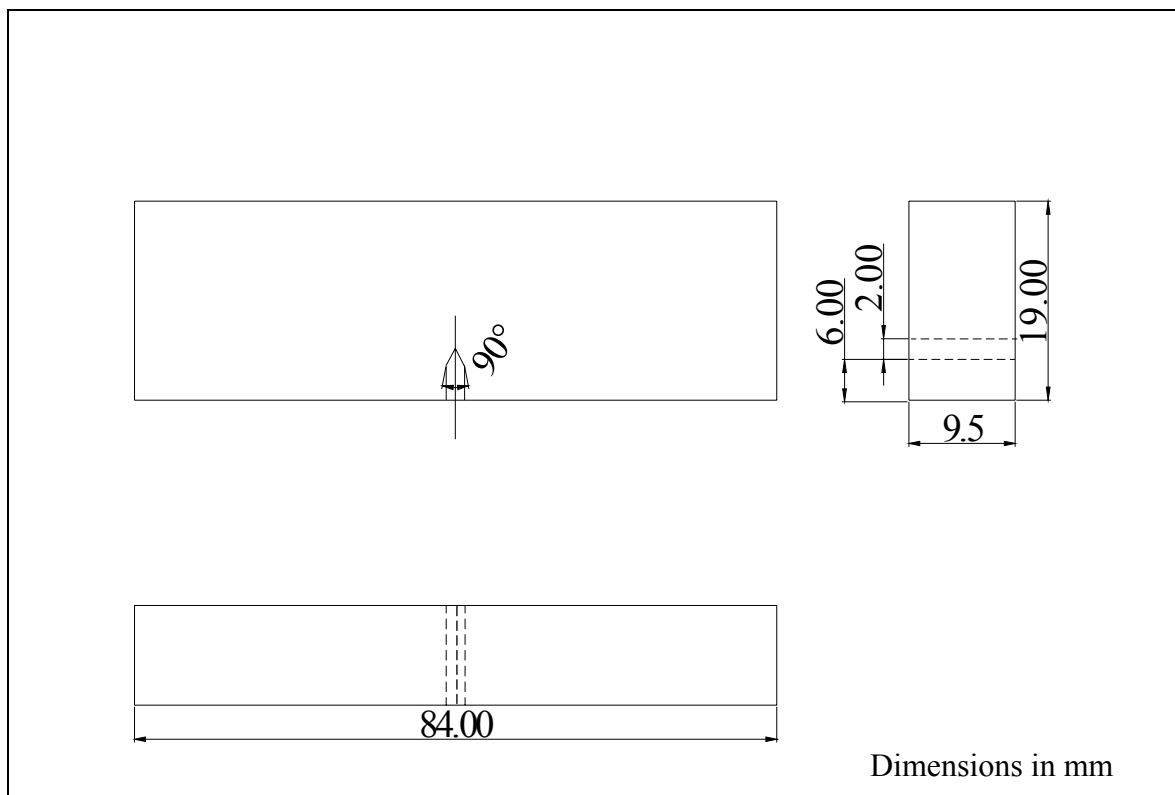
Geometry and dimensions of the SENB specimen used in this study.
